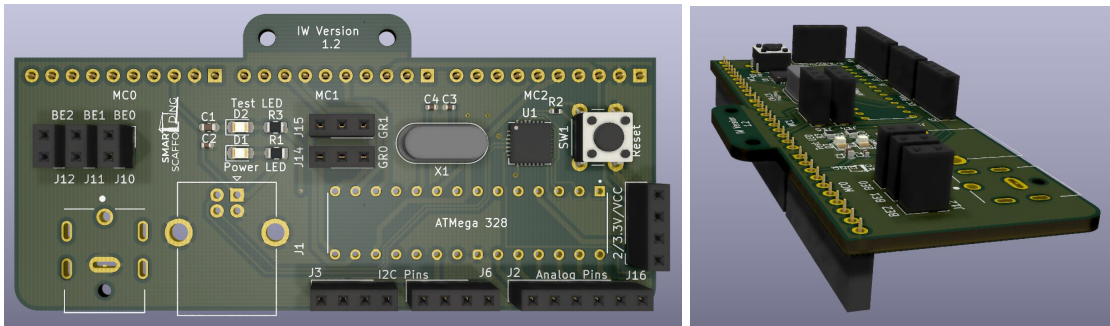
Kicad custom PCB via view with board  dimensions
